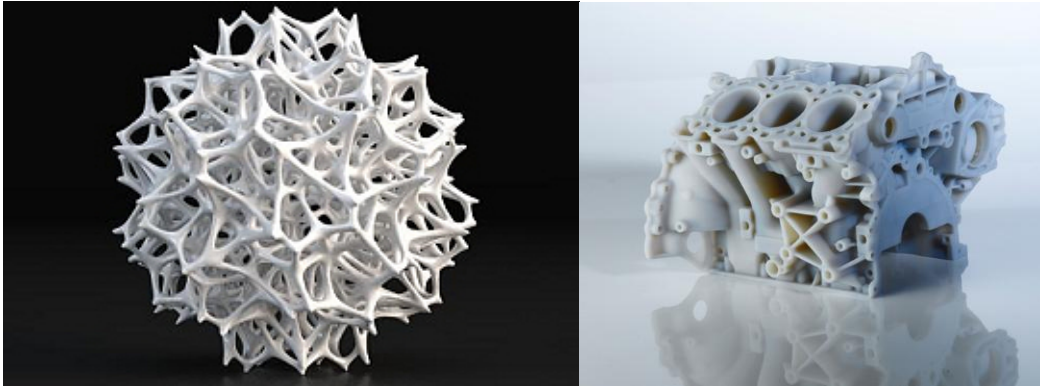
Left: An object only capable of being fabricated through 3D printing [34], Right: Eden 3D printed engine [35].
